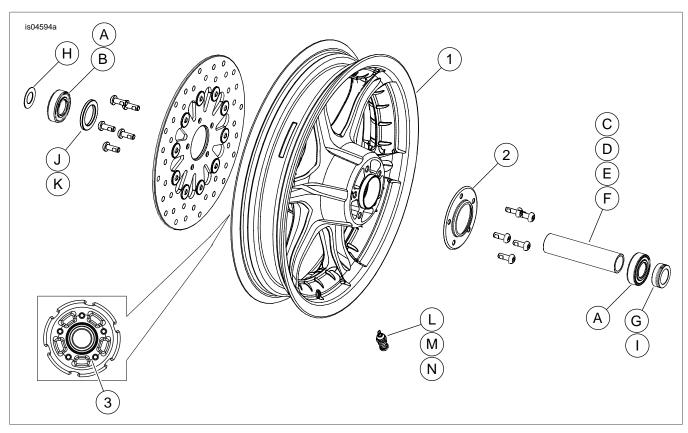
Service Parts: Front Slotted Six-Spoke Wheel (16-inch wheel shown)
